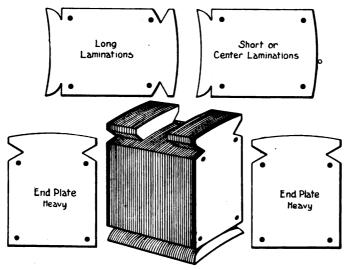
Pole-Core Stampings and Assembled Pole-Piece.
